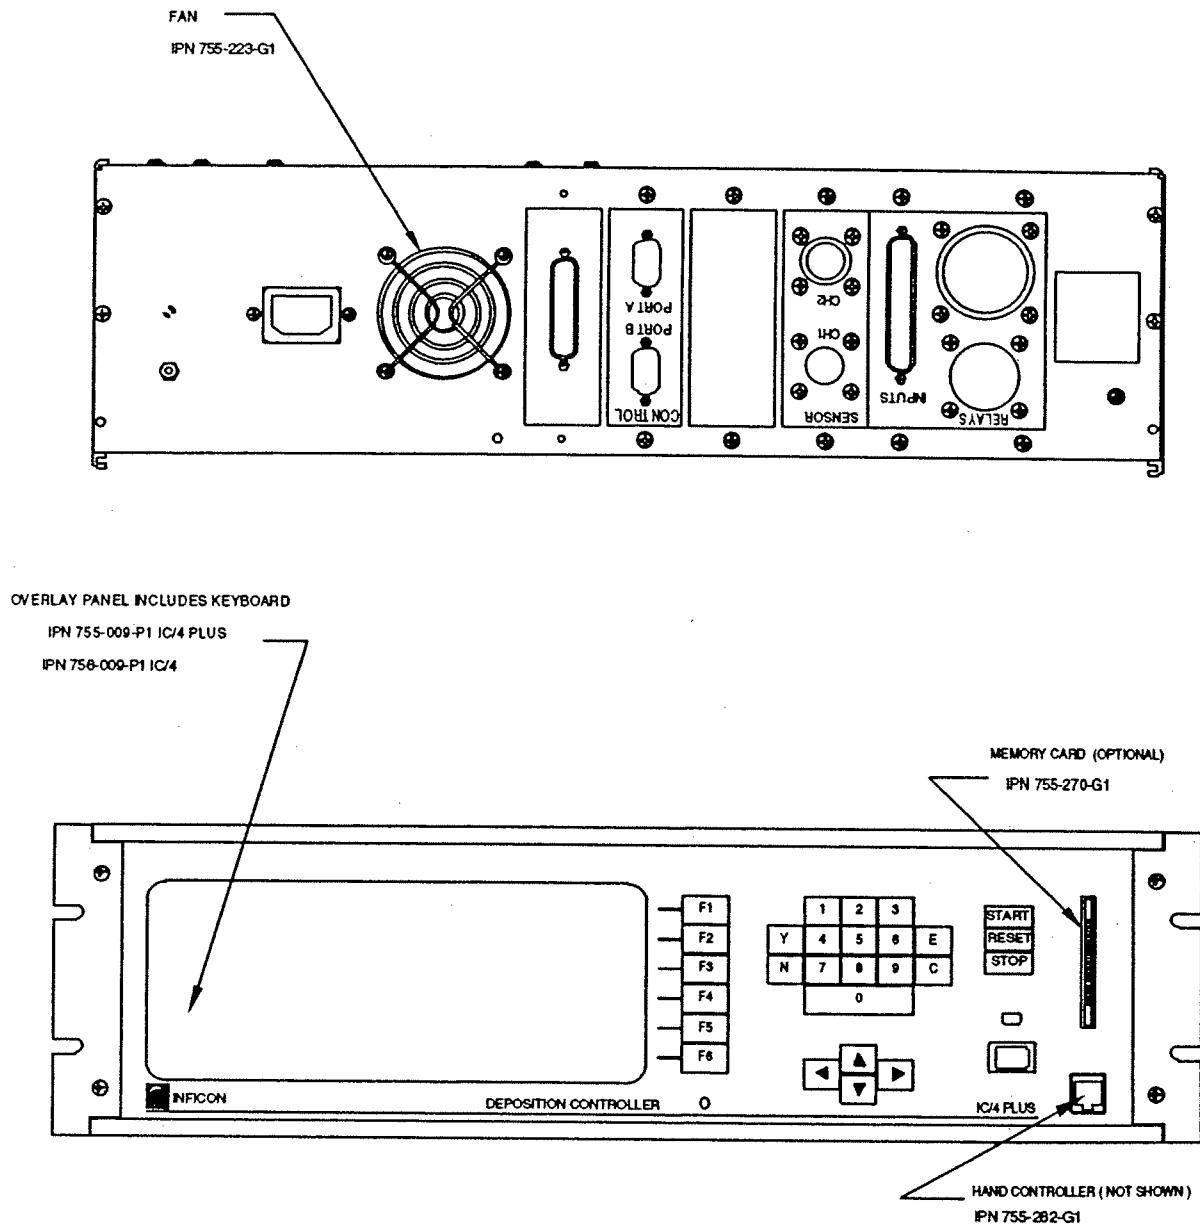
IC/4 Schematic Assembly (Rev. A)
